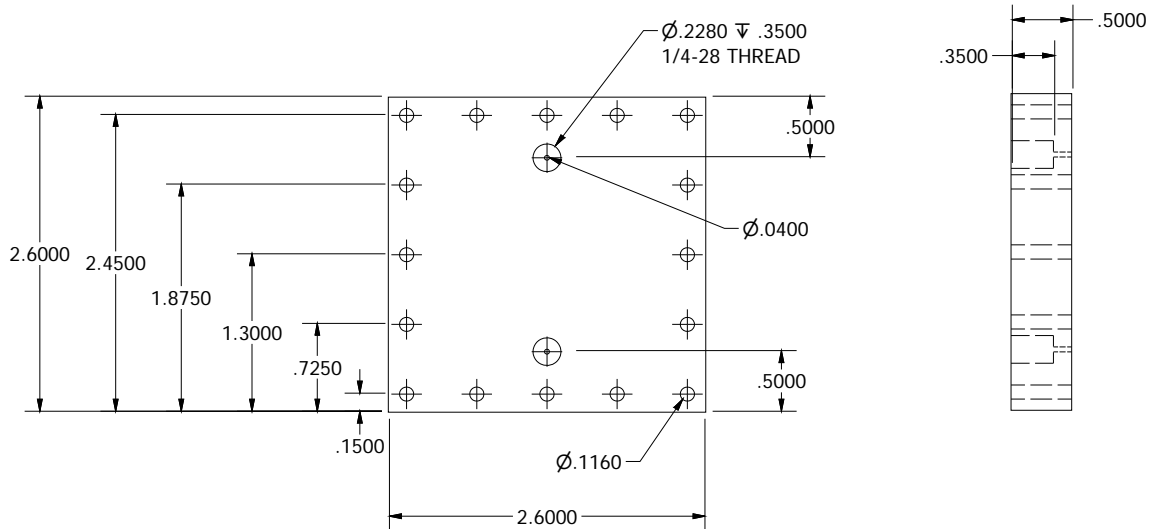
Drawing of top and bottom plate for membrane separator. All dimensions given in inches.
